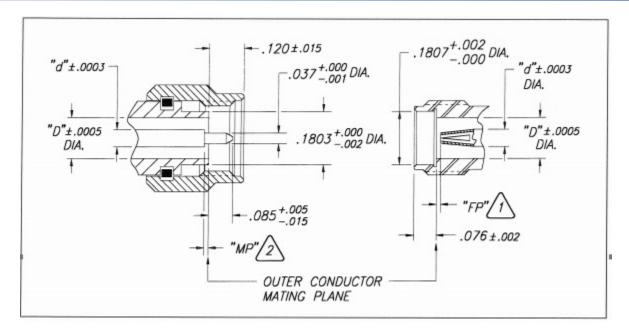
Critical Center Contact Location Dimensions for 2.92mm and 3.5mm Connectors
